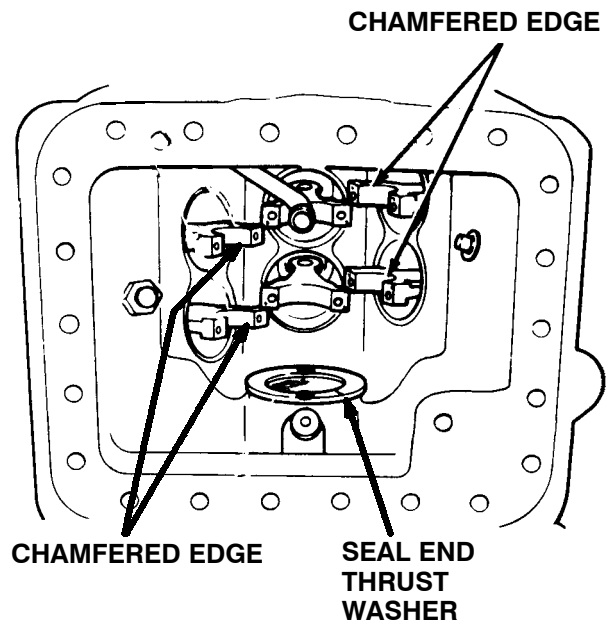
Installing Piston Rod Assemblies and Seal End Thrust Washer
